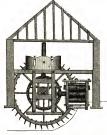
Flax-breaking machine with scutcher (H) above. (Y, 2) Holes for inserting broken flax to be scutched; (1, 2, 3) rolls for breaking the flax.
